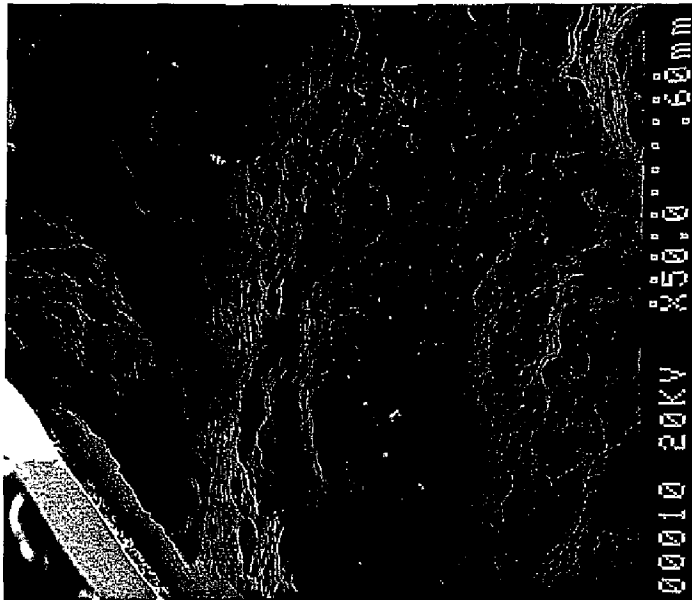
SEM fractography of specimen 1A-2, at outer surface.
